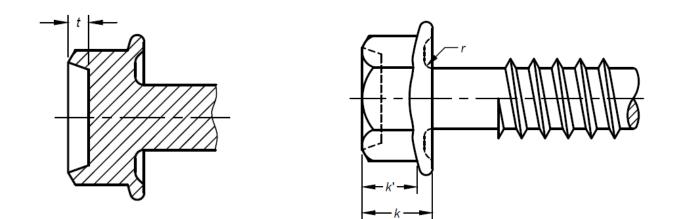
HEXAGON FLANGE HEAD DRILLING SCREW
